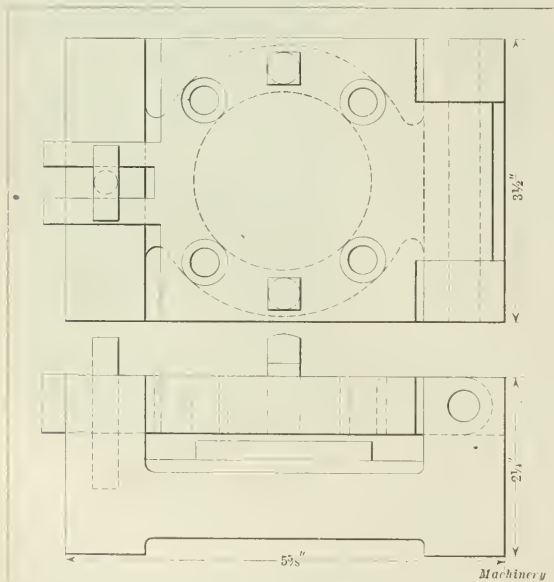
Uneconomical Design of Box Jig for drilling and reaming Four Holes in a Ring
